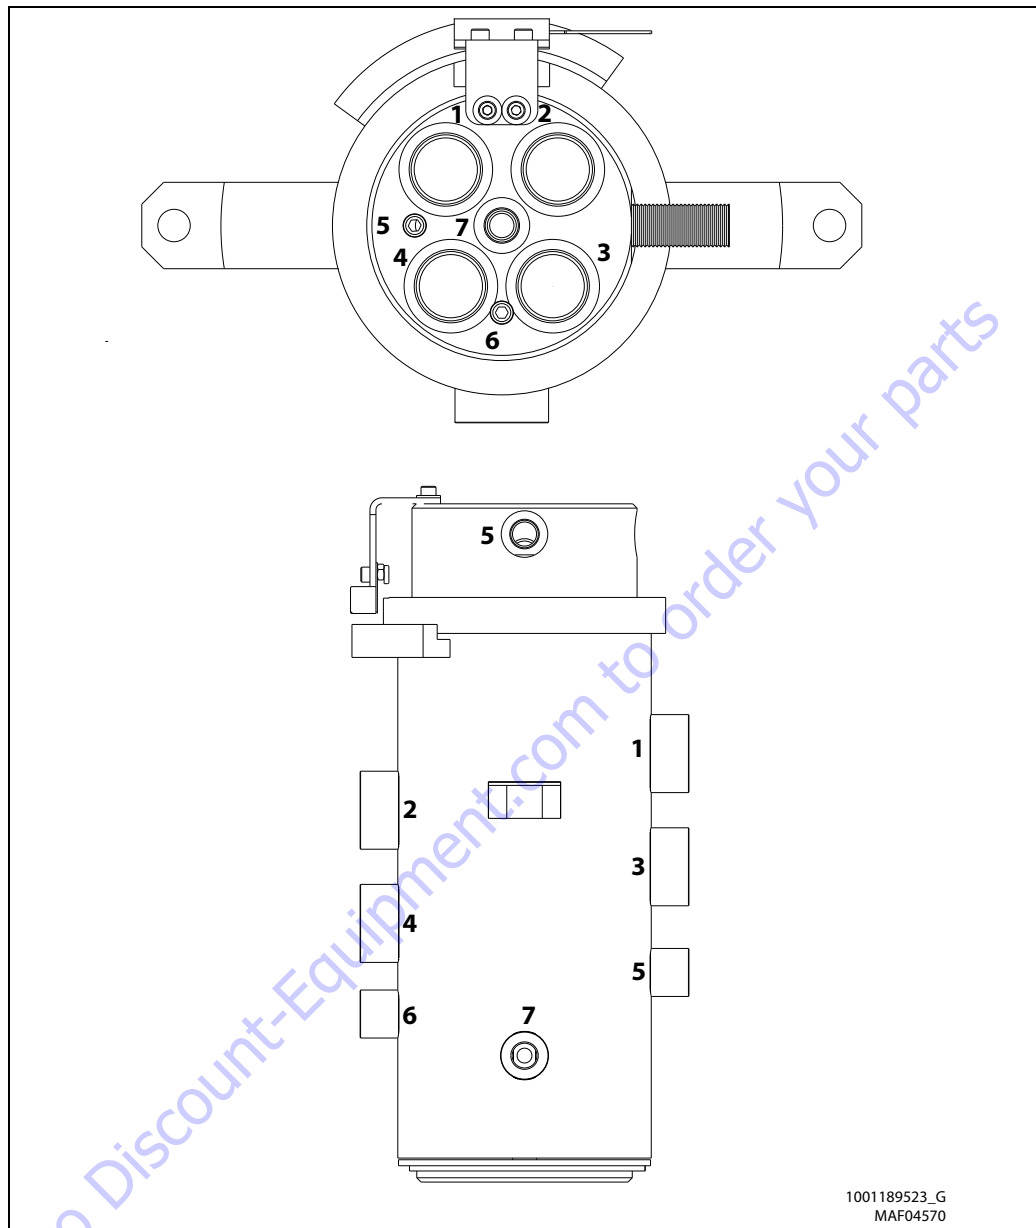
Rotary Coupling Installation (With Turntable Bearing Spacer)
